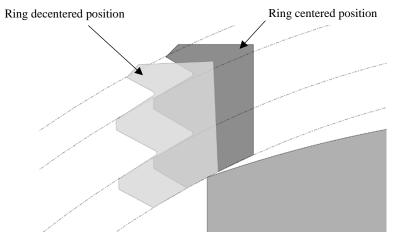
Ring spherical mounting surface not impacted by ring decenter and tilt.
